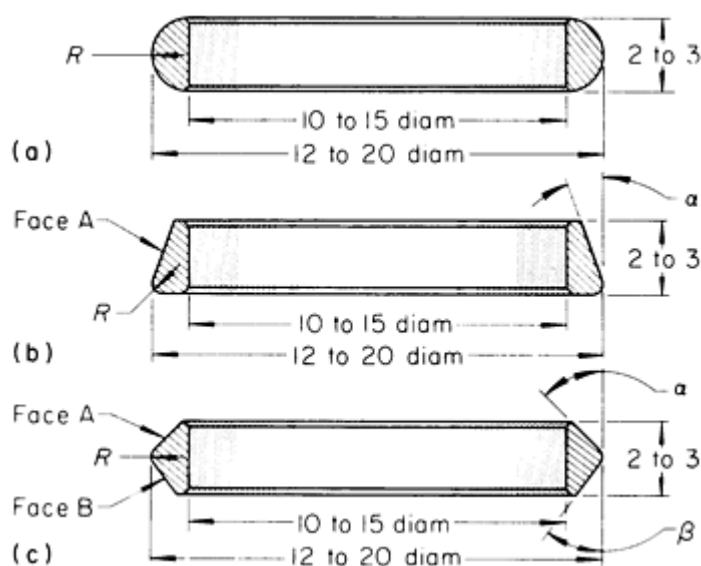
Typical rollers used in the spinning of cones and hemispheres. (a) Full-radius roller. (b) Corner roller. (c) Thinning roller. Dimensions given in inches.
